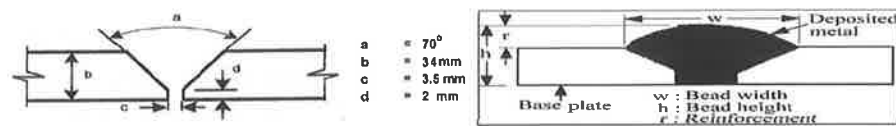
Joint Detail and Weld Geometry [Refer to Annexure-5 for WPS used in welding]
